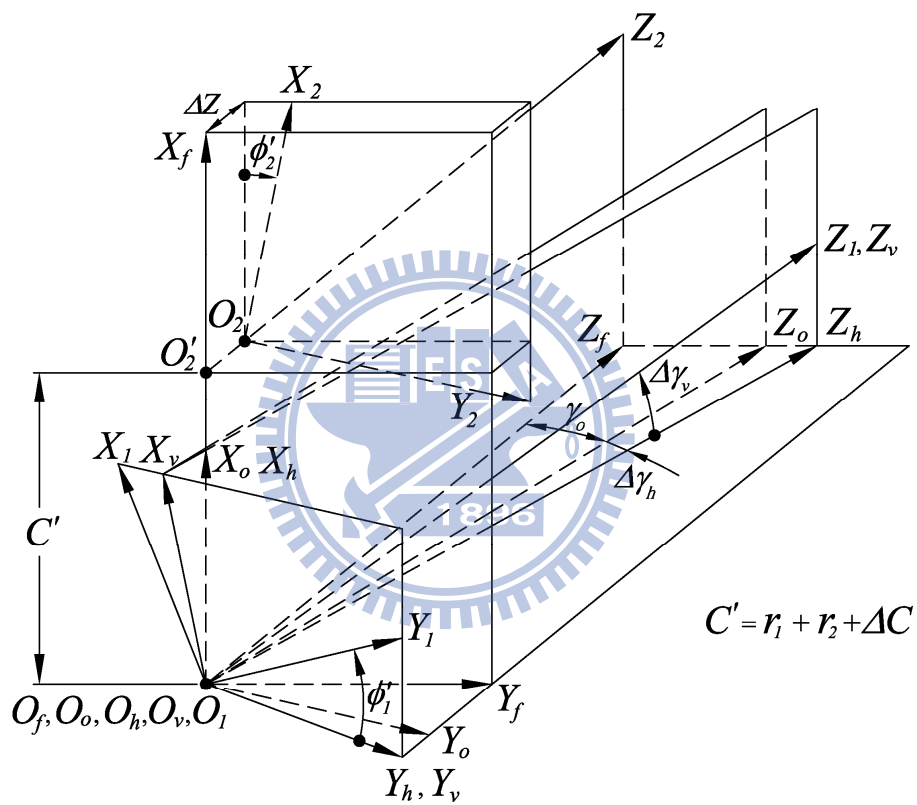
Simulation of meshing for spherical helical gear set with assembly errors
